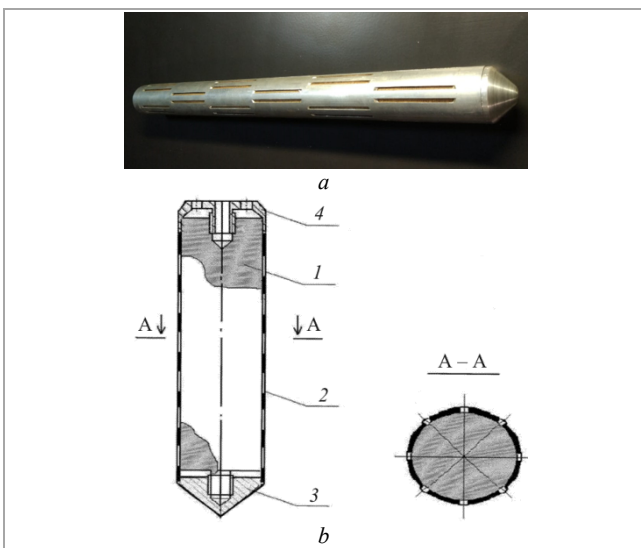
Device: a – photo; b – diagram; 1 – coolant; 2 – shell; 3 – top cap; 4 – end cap
